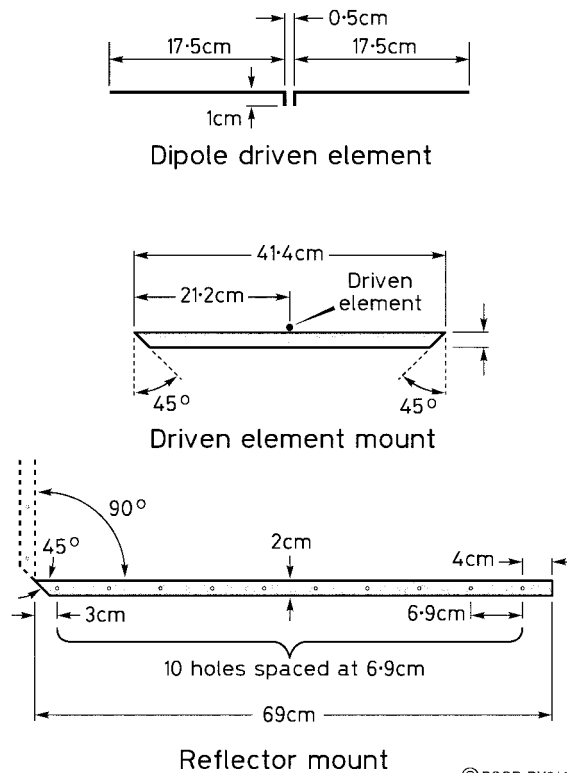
Driven element dimensions, together with boom dimensions for driven element and reflectors
